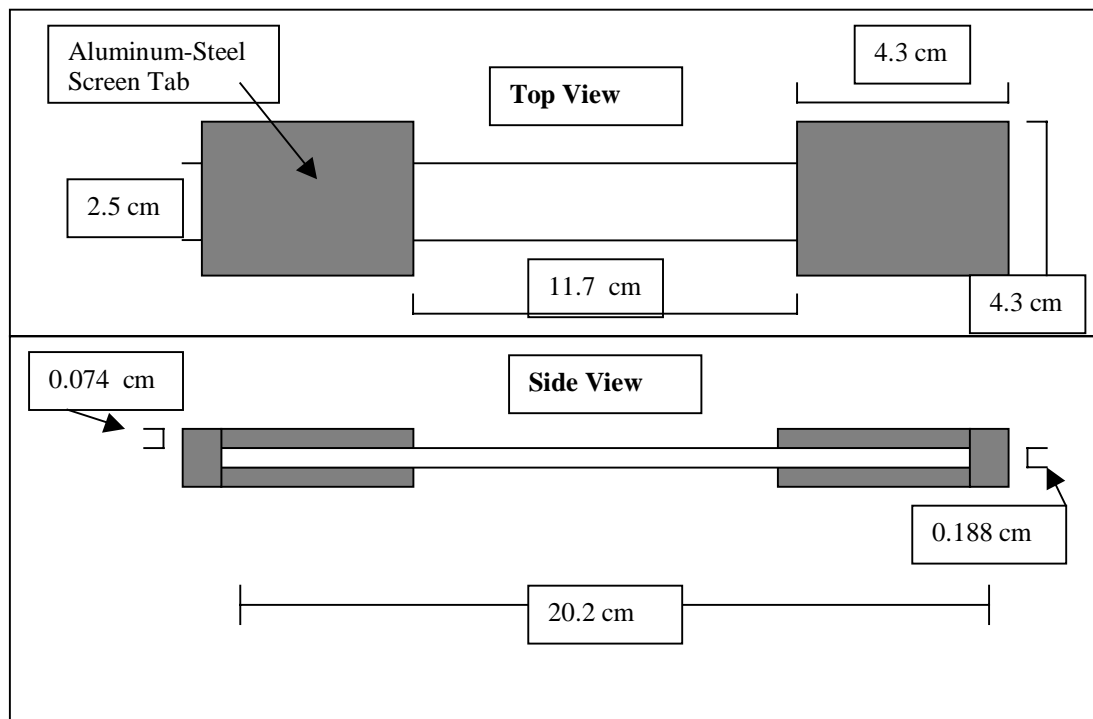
Drawing of a typical test specimen for vinyl ester system.
